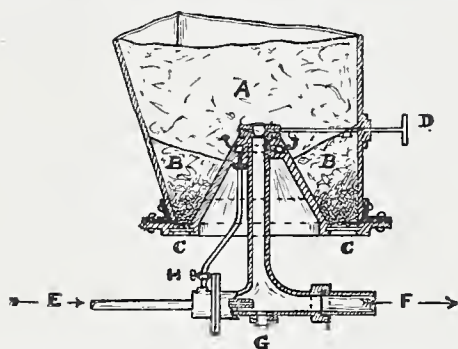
Suggested Arrangement of Syphon Feeder for Dry Fuel Supply.
